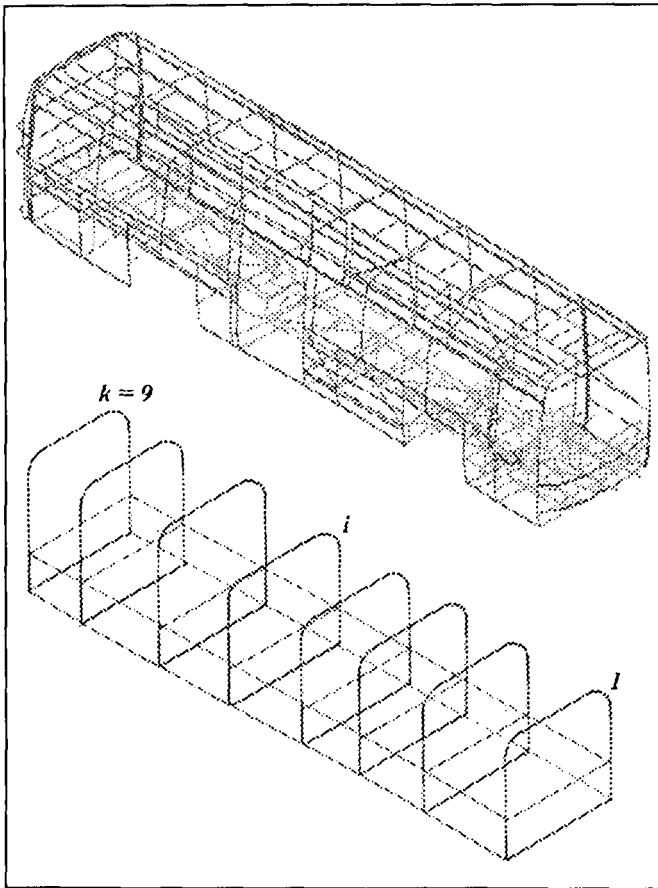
Each bus or coach can be modeled with plane cross-sectional segments.
